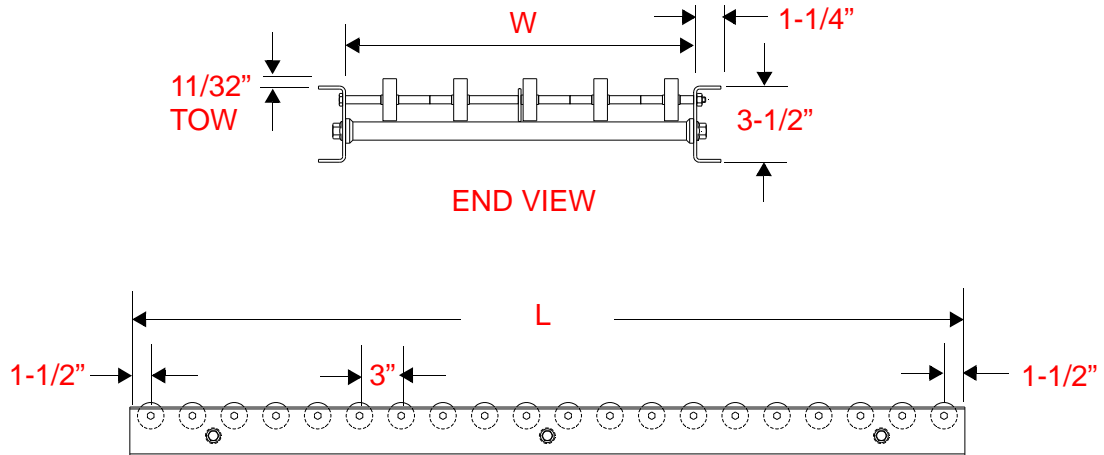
Medium Duty Wheel Conveyor - Straight Section
